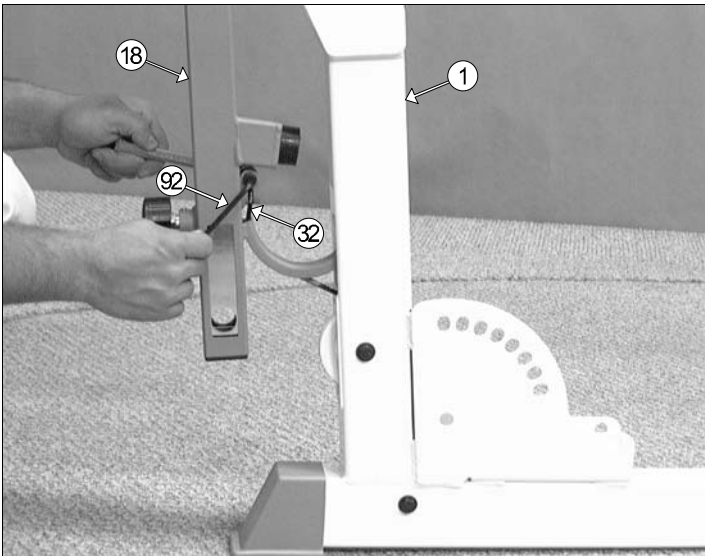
Confine the Leg Extension Cable (#32) within the strap bracket welded to the Leg Extension Arm (#18) using a Shoulder Bolt 3/8 X 3/4 (#86), and a Nylon Insert Lock Nut 5/16-18 (#99). Use the supplied Hex Key 3/16" (#92) and a 1/2" combination wrench to fasten this assembly properly.
